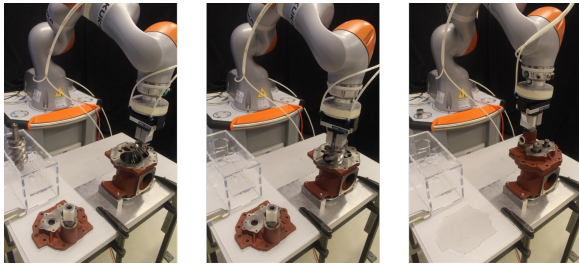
The robot performing the assembly sequence of the compressor parts. From left to right: assembly of the small rotor, the big rotor, and the housing lid.
